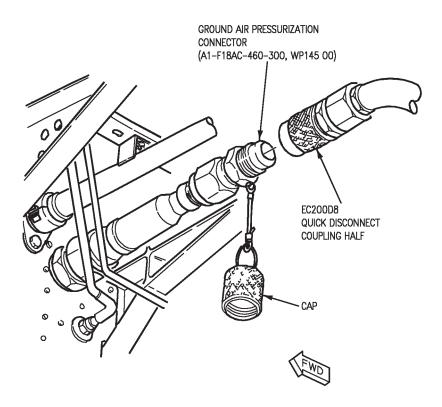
External Fuel Tanks Transfer Test (Sheet 3)
